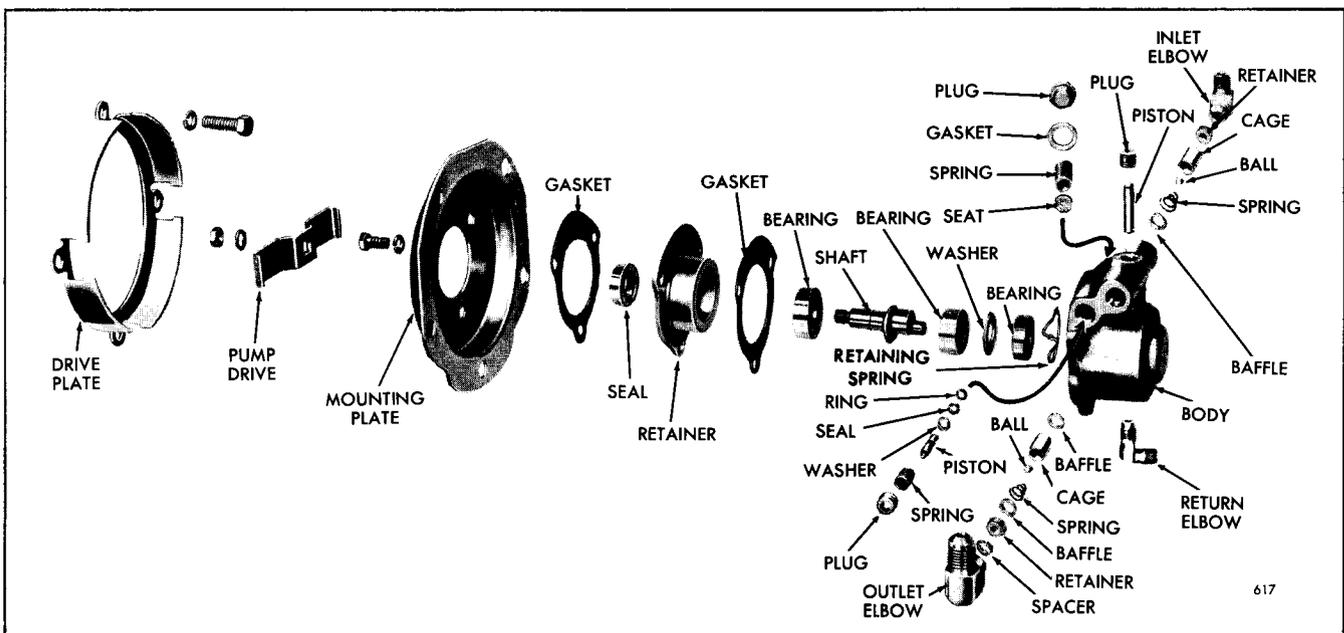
Direct Engine-Driven Charging Pump Details and Relative Location of Parts
